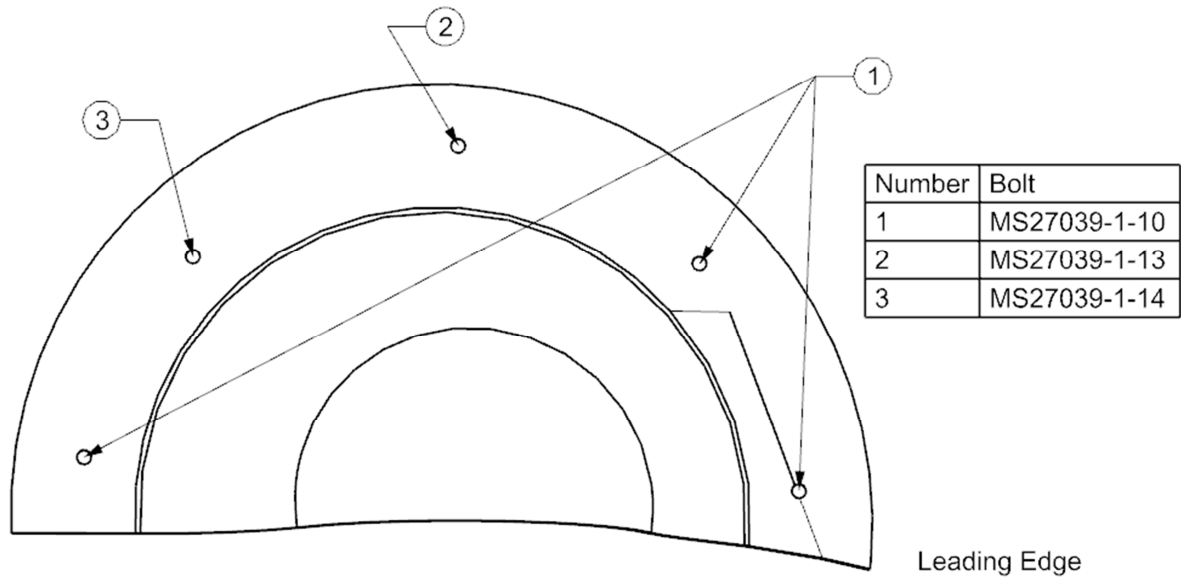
Outboard Wing Pylon Forward Lug Cover Fastener Placement
